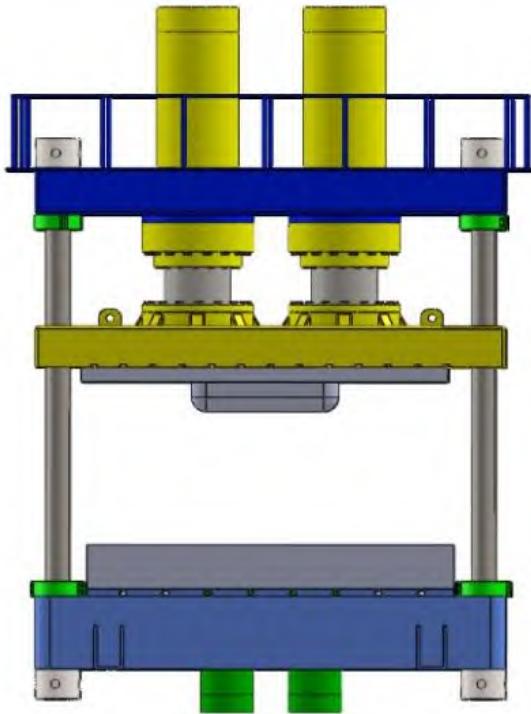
Final assembly view of 1000-ton hydraulic deep drawing press.
